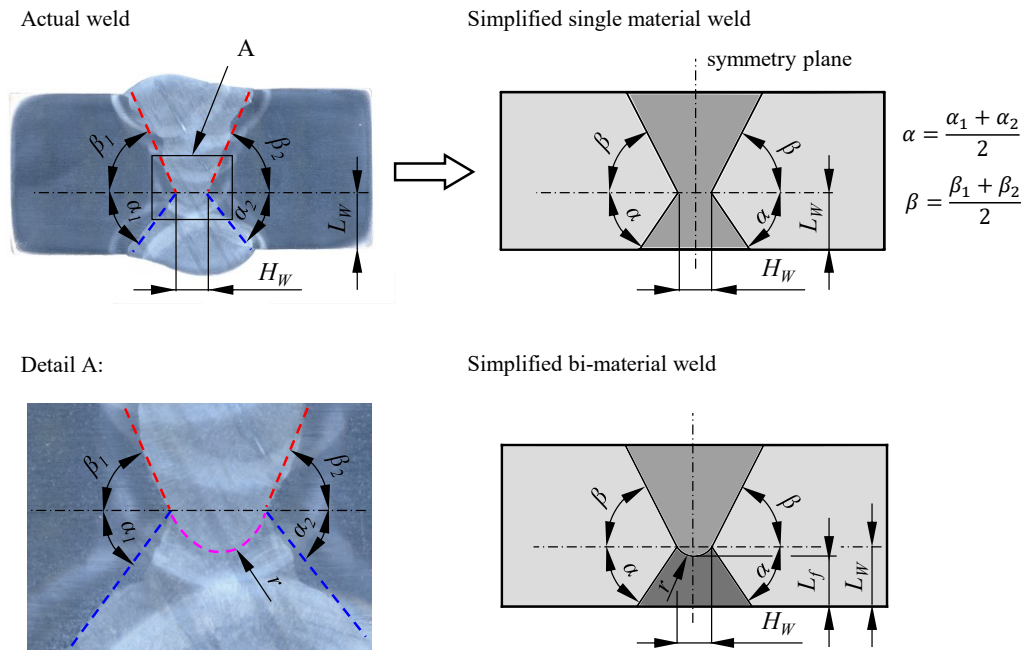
The approach to derive a simplified weld from an irregularly shaped actual weld.
